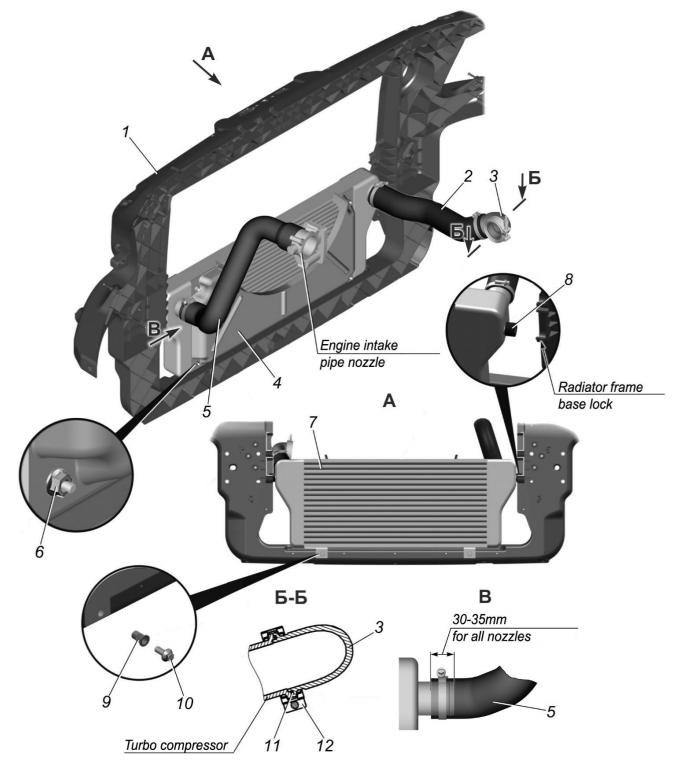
Charge air cooler installation: 1 – frontend; 2.5 – hoses; 3 – discharge nozzle; 4 – lower fan shroud; 6 – nut; 7 – charge air cooler; 8 – pad; 9 – threaded rivet; 10 – bolt; 11 – ring; 12 – clamp
